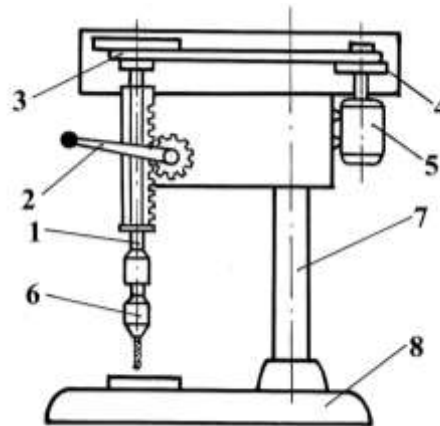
Bench-type drilling machine: 1 – spindle; 2 – handle; 3, 4 – cone pulleys of V-belt transmission; 5 – electric motor; 6 – chuck with drill; 7 – column; 8 – bed
